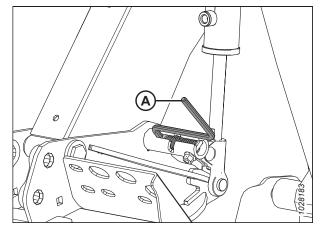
Engaged Reel Safety Prop – Center Arm
